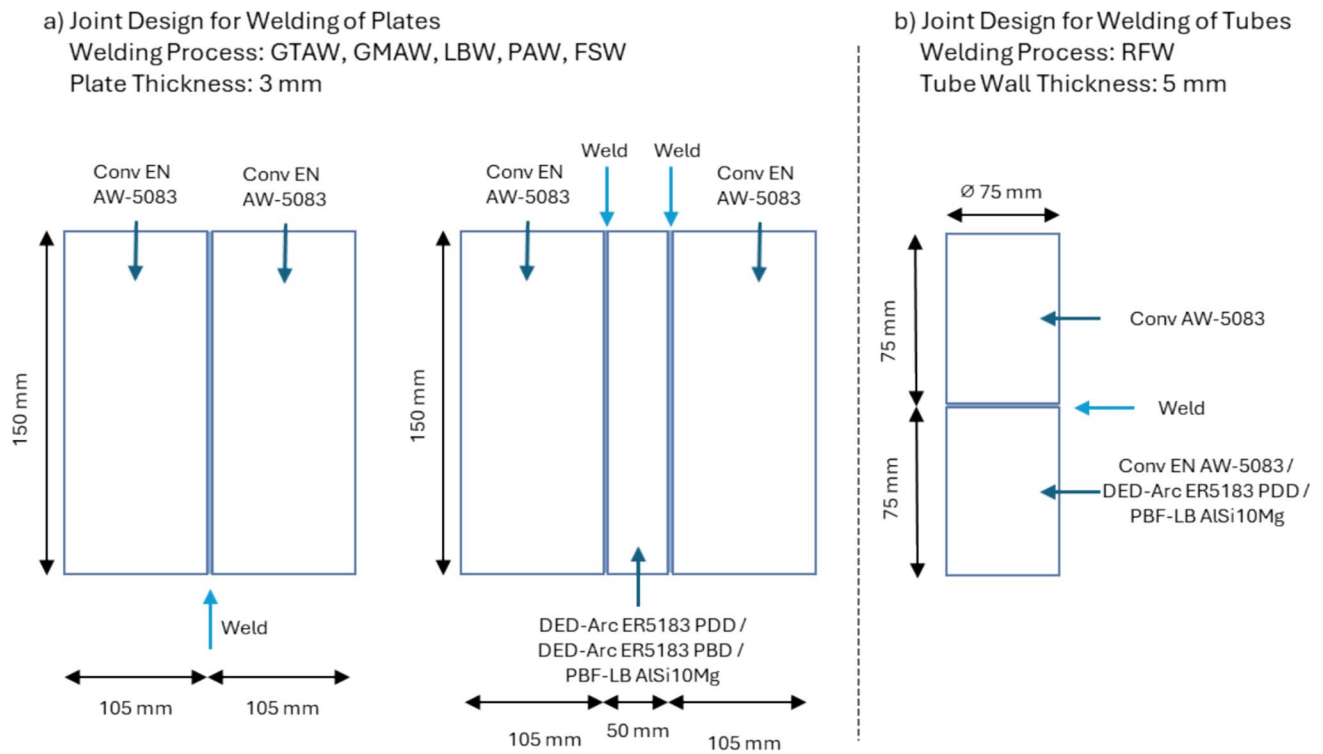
Joint design for welding of a plates by GTAW, GMAW, LBW, PAW, and FSW processes and of b tubes by RFW process
